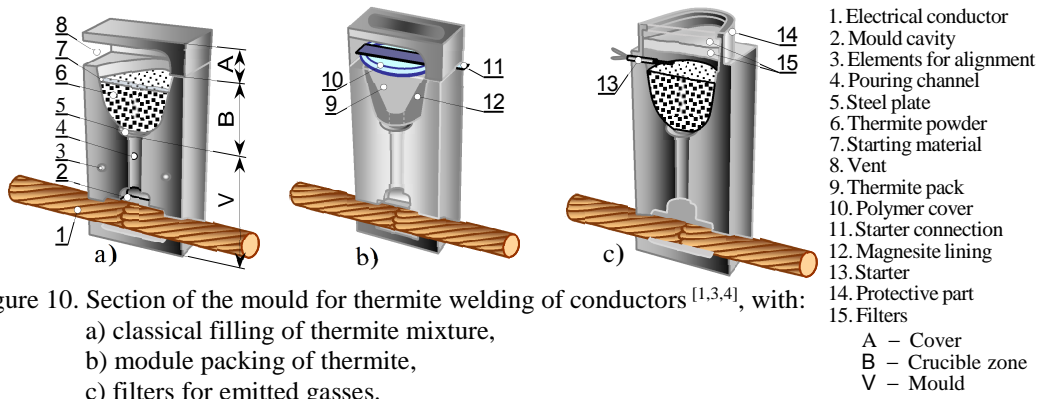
Section of the mould for thermite welding of conductors^[1,3,4], with:
